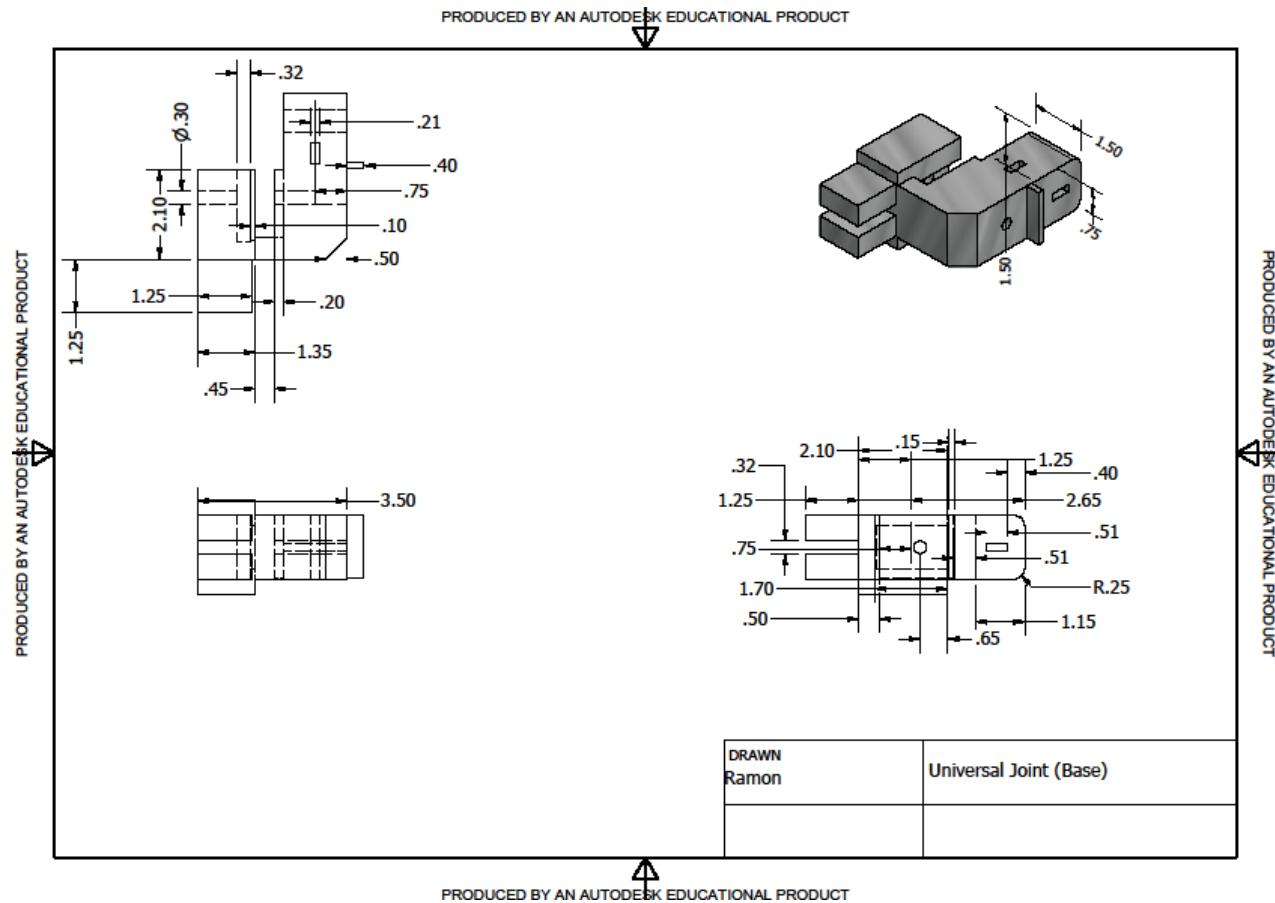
CAD drawing of the Universal Joint (Base) of the 6-DOF sensor.
